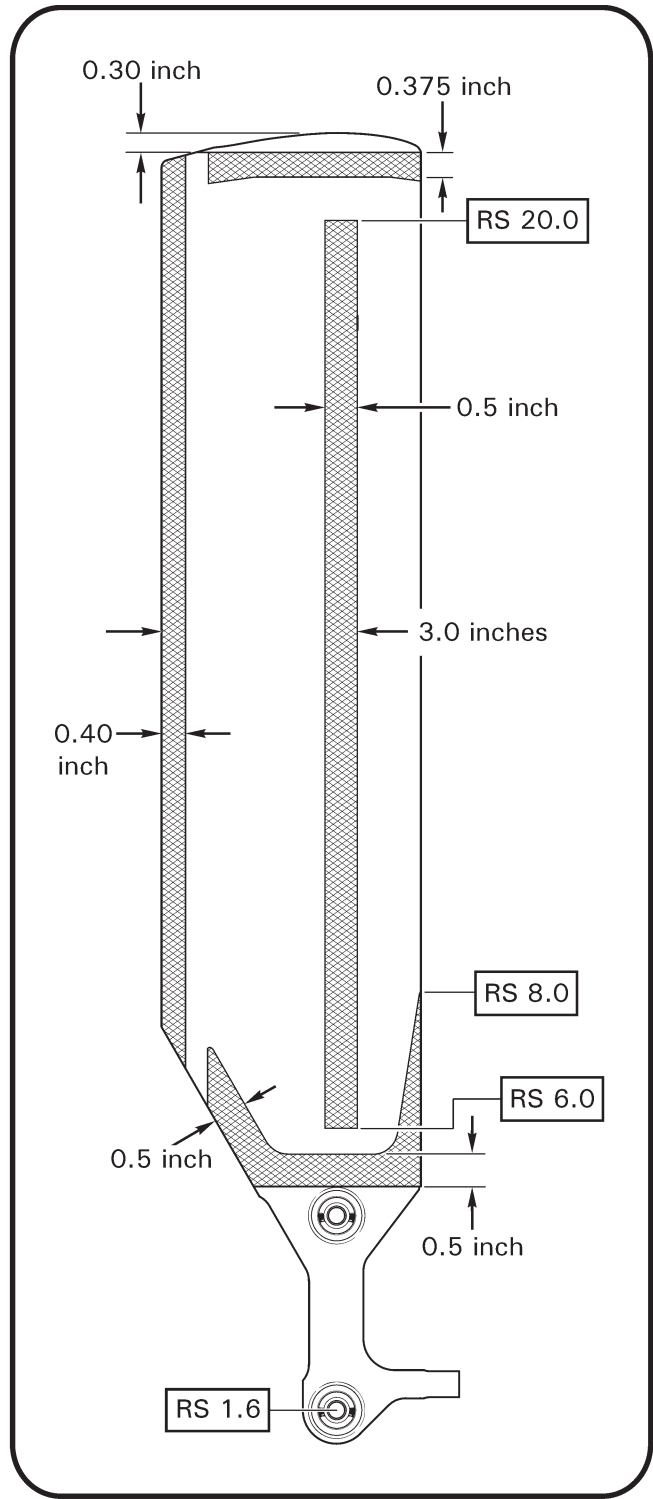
TAIL ROTOR BLADE BONDED AREAS
